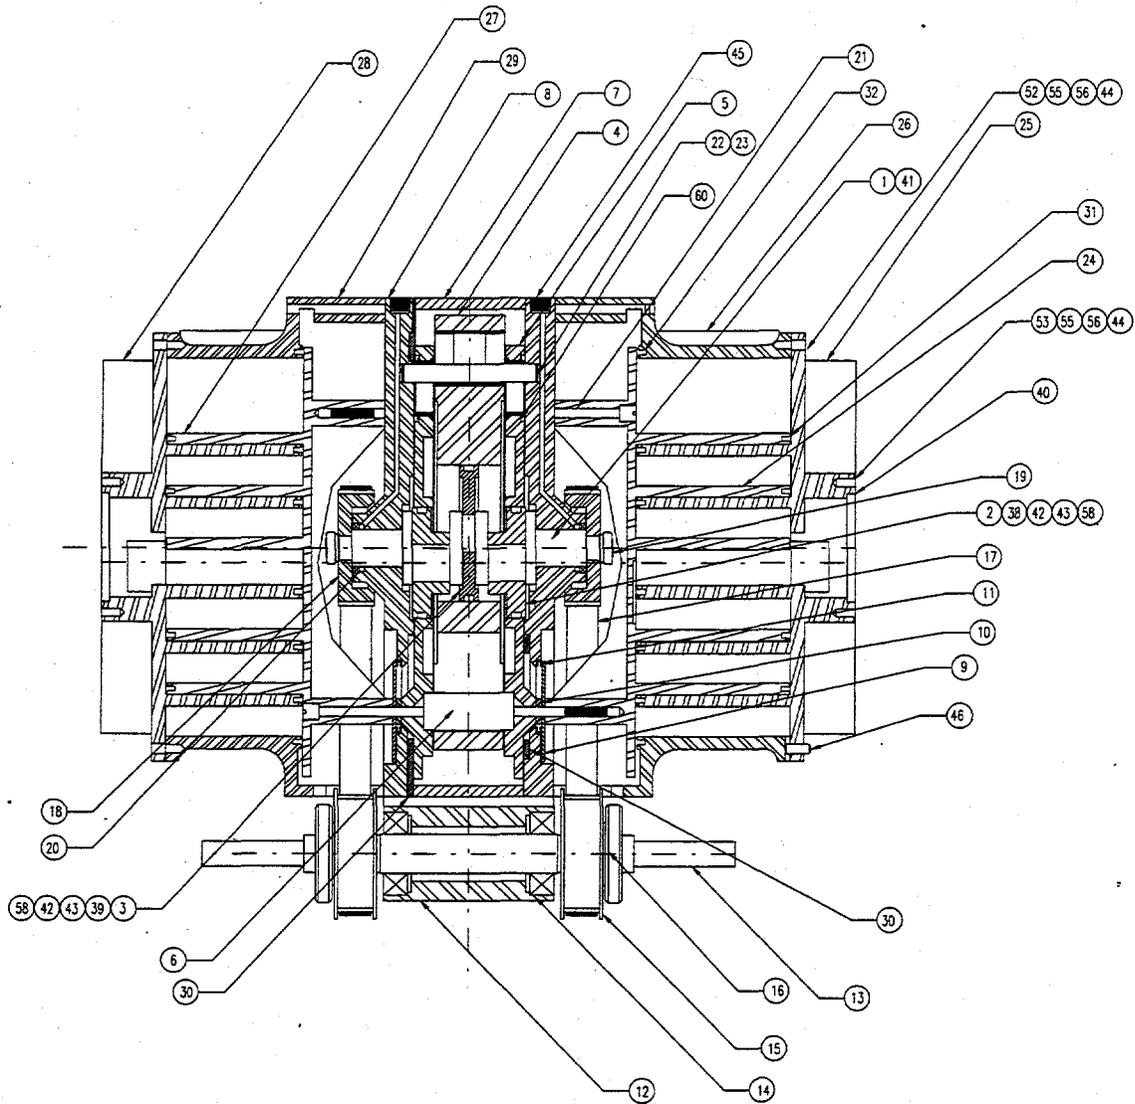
Integrated Scroll CEM Assembly- Top View
